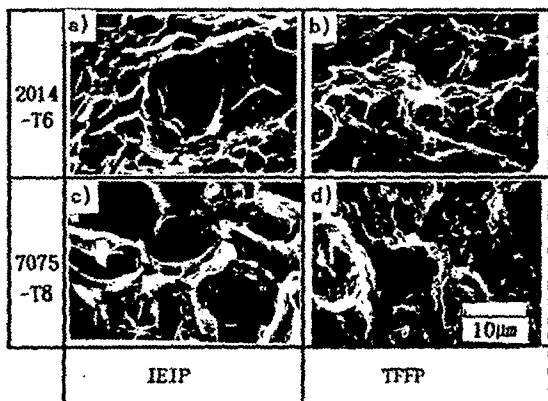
Tensile fractographs of 2014-T6 and 7075-T8 Motor tubes
